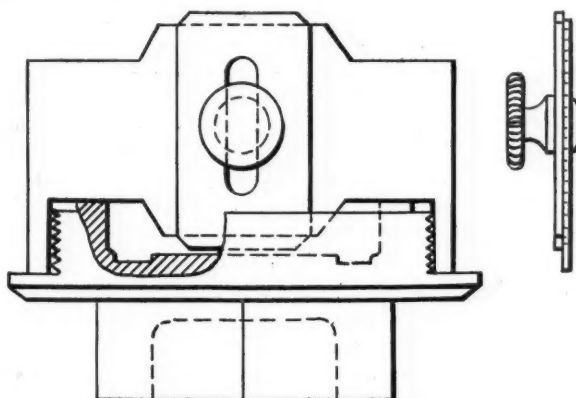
Gage for Checking the Depth of Air Pump Receiving Valve Cap.
